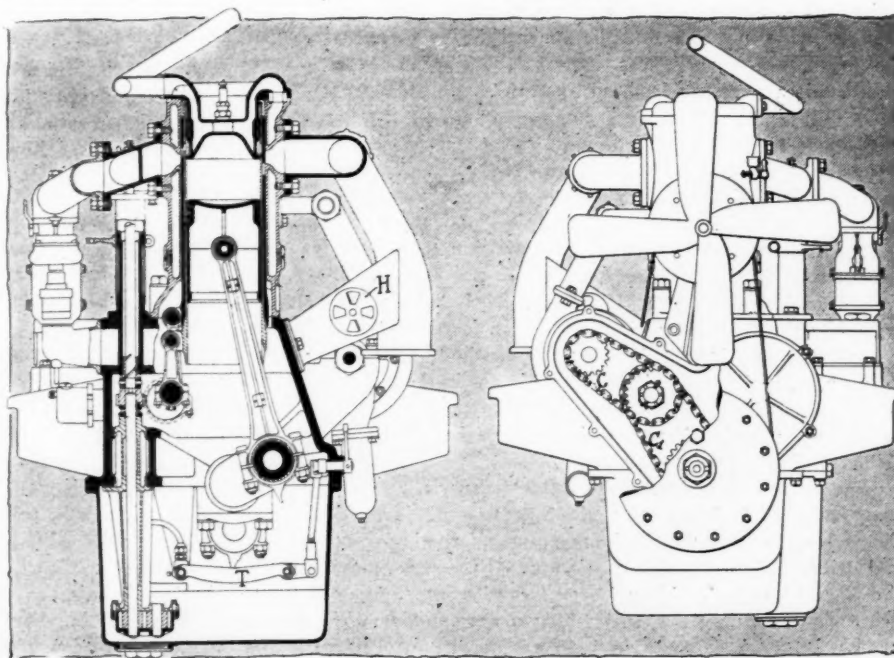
Transverse section through Knight motor and view of chain drive to magneto shaft
